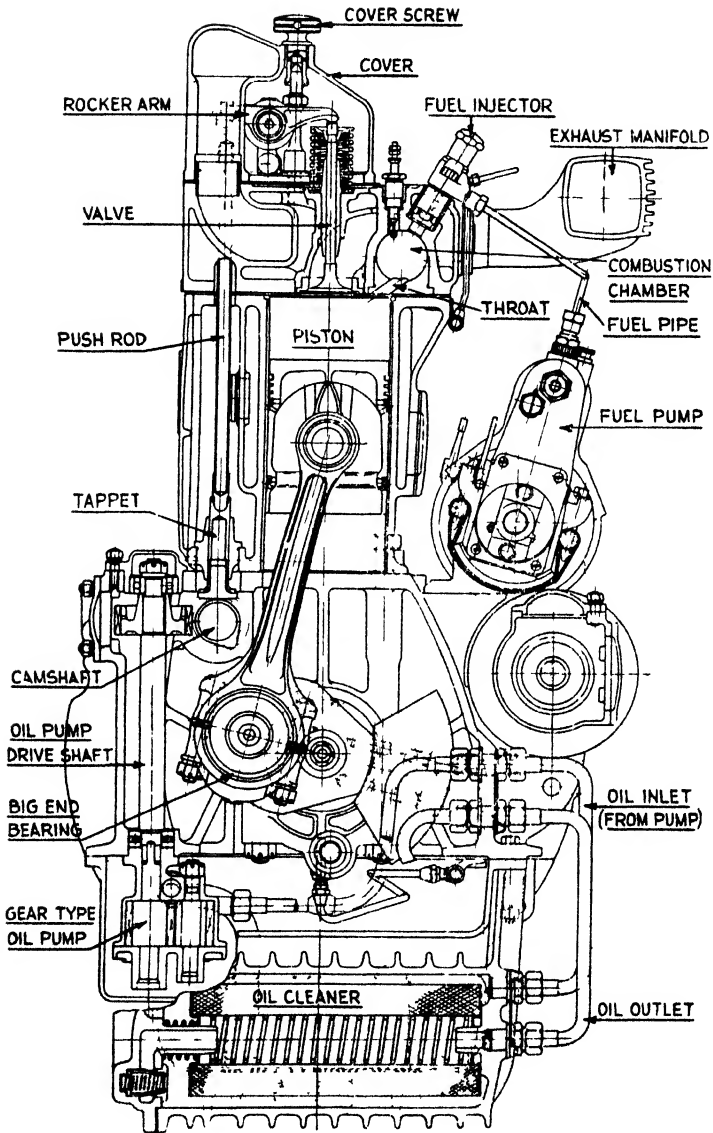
Sectional view of A E C Engine, showing Lubrication System and Principal Components
